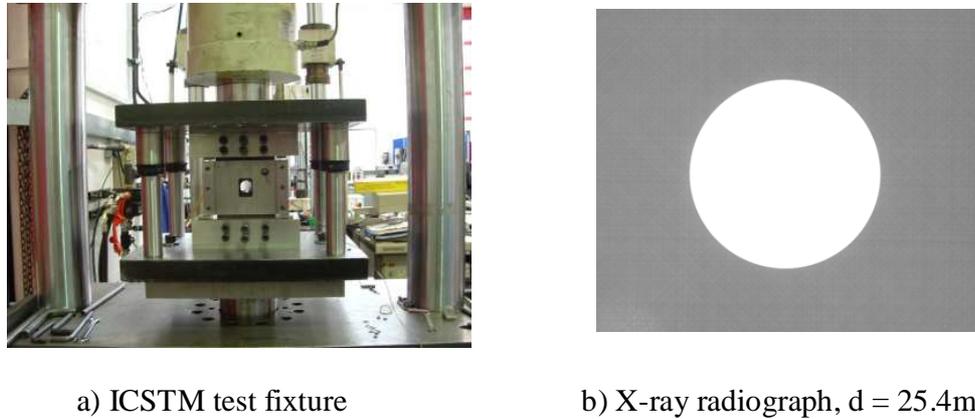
a) Compression test fixture. b) Typical X-ray radiograph illustrating hole quality of specimens used in this study; no drilling damage is visible.
